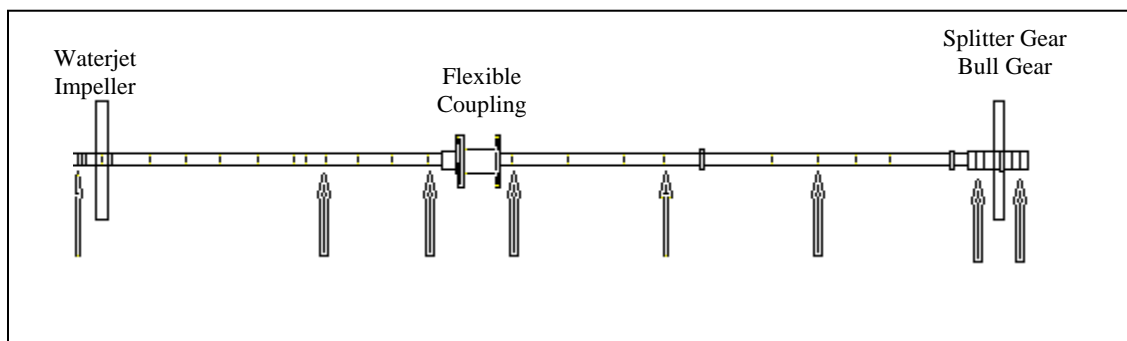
Outboard (Steerable) Waterjet Drive Shaft Finite Element Model
